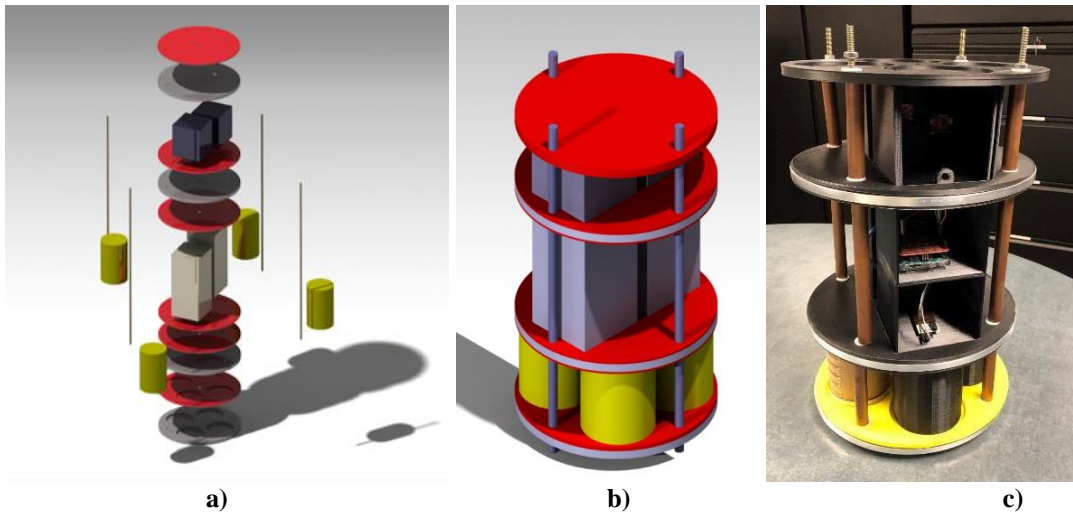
Payload Design and final assembly. (a) Exploded CAD view of the payload bay. (b) CAD view of the payload assembly. (c) Fabricated and preliminary assembled payload bay.
